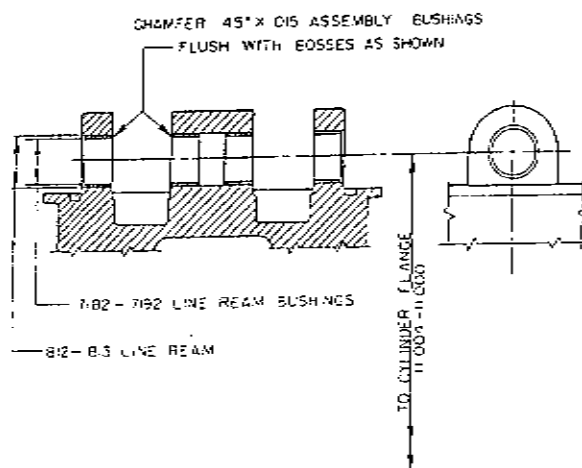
Dimensions of Rocker Shaft Support Bushings
